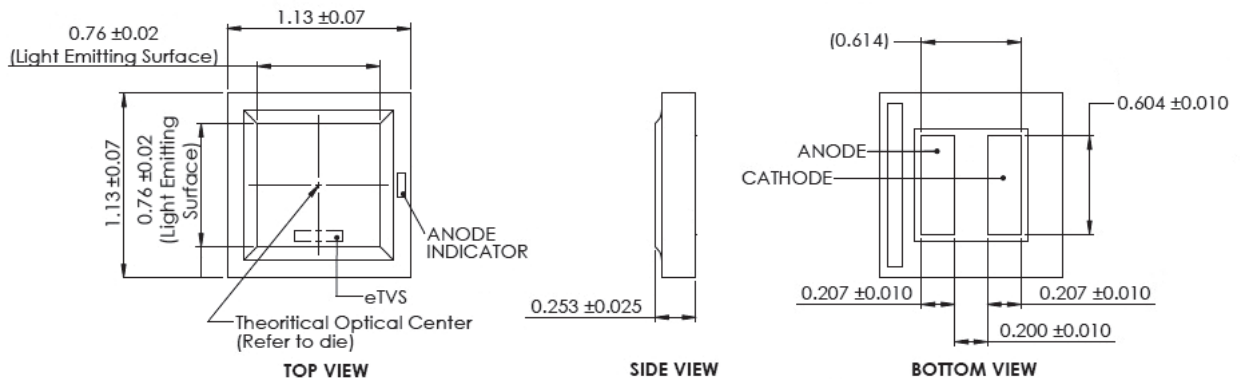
Dimensions in millimeters for LUXEON Neo 0.5mm²
